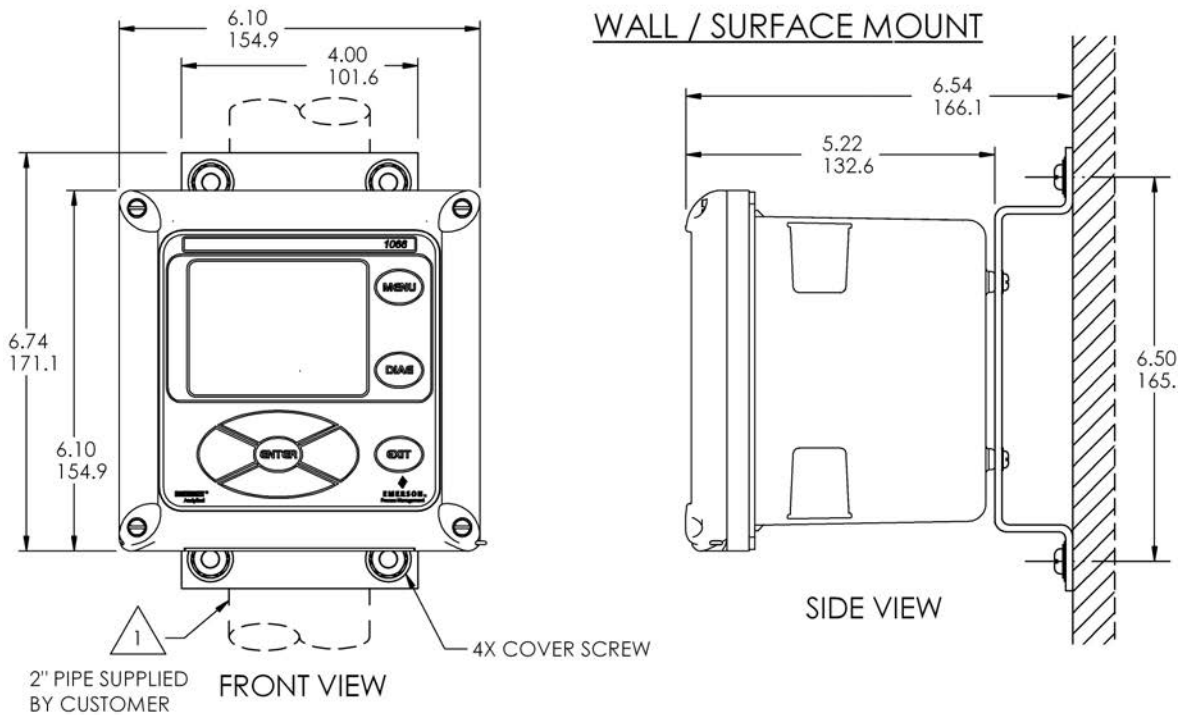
Pipe and wall mounting dimensions (Mounting bracket PN: 23820-00)
